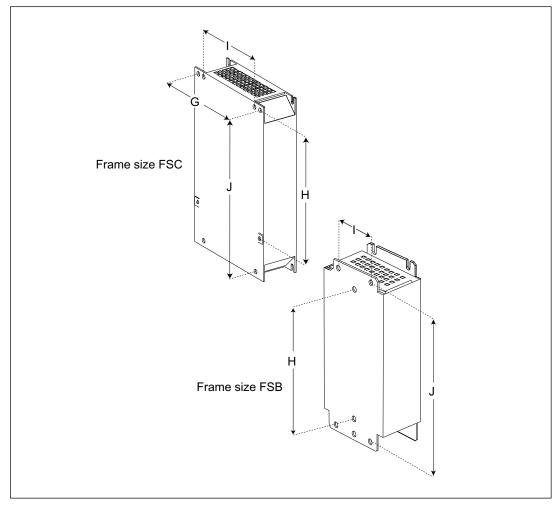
Mounting: Motor reactor, frame sizes FSB and FSC
